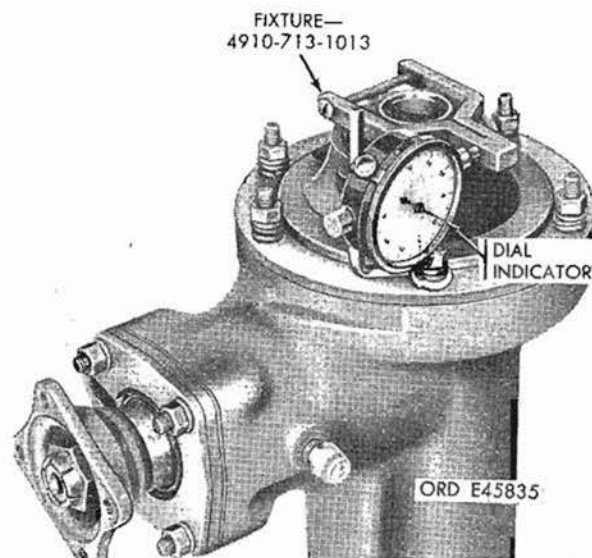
Checking backlash between drive pinion and bevel drive gear using fixture - 4910-713-1013.
